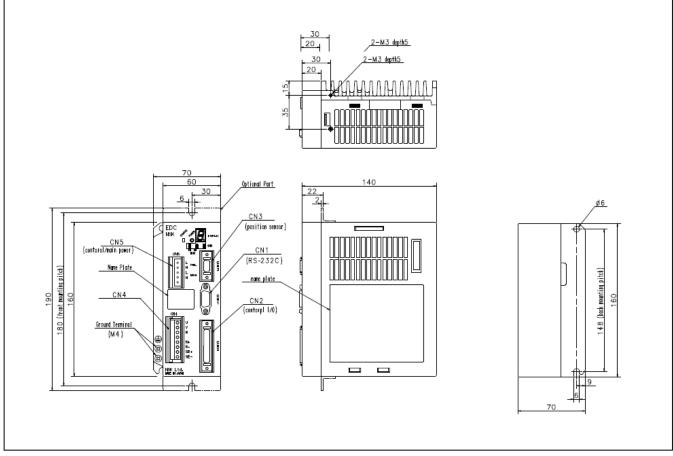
CC-Link Compatible EDC Driver Unit for PN3045, PN4135 and PN4180 Megatorque Motors
